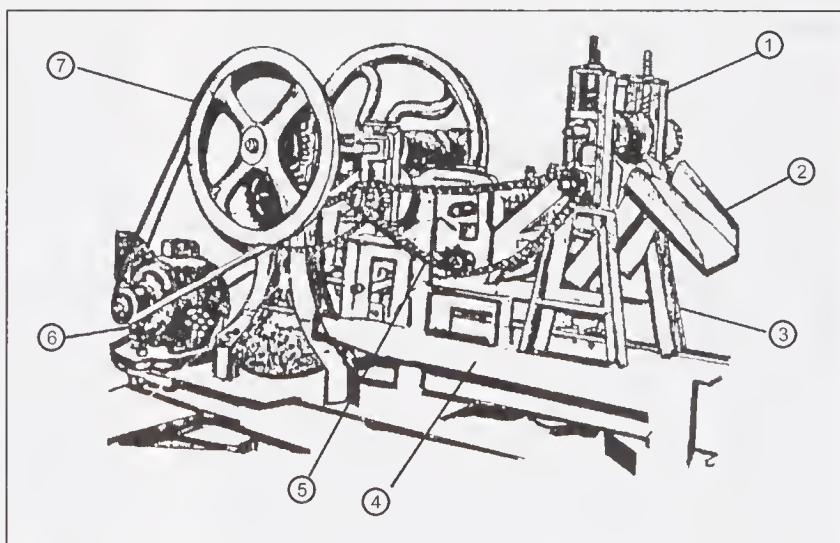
Jute decorticator or ribboner (NIRJAFT design). 1, Extractor; 2, Outlet; 3, Stand; 4, Base; 5, Chain drive; 6, Motor and 7, Pulley.
